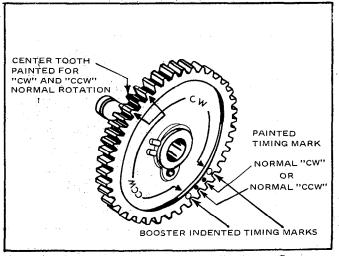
Present Production Distributor Gear Assembly with Additional Timing Marks Painted
